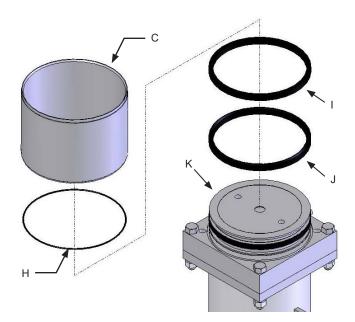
Remove the rest of the Seals from the Cylinder Assembly.
